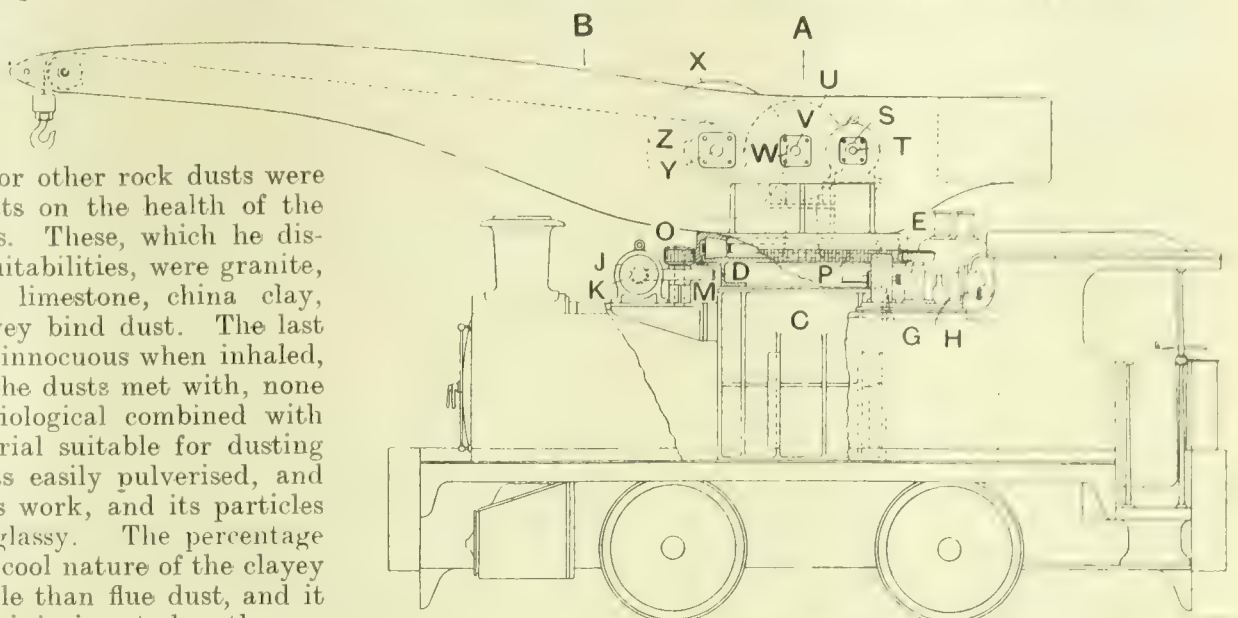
COMBINED CRANE LOCOMOTIVE.
